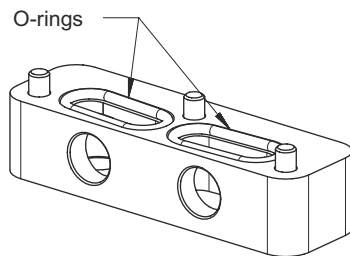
Cooling connection adapter (option) for 1FW6160, 1FW619x, 1FW623x
